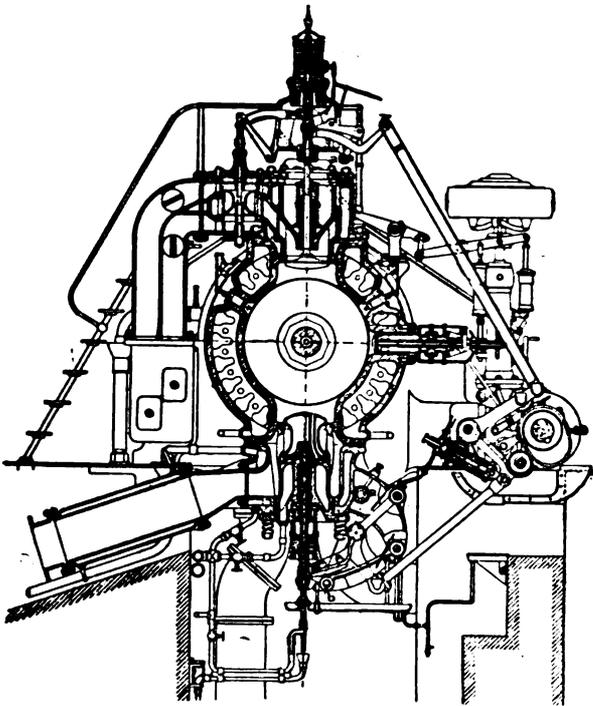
Governing Device, Otto-Deutz double-acting Engines.
